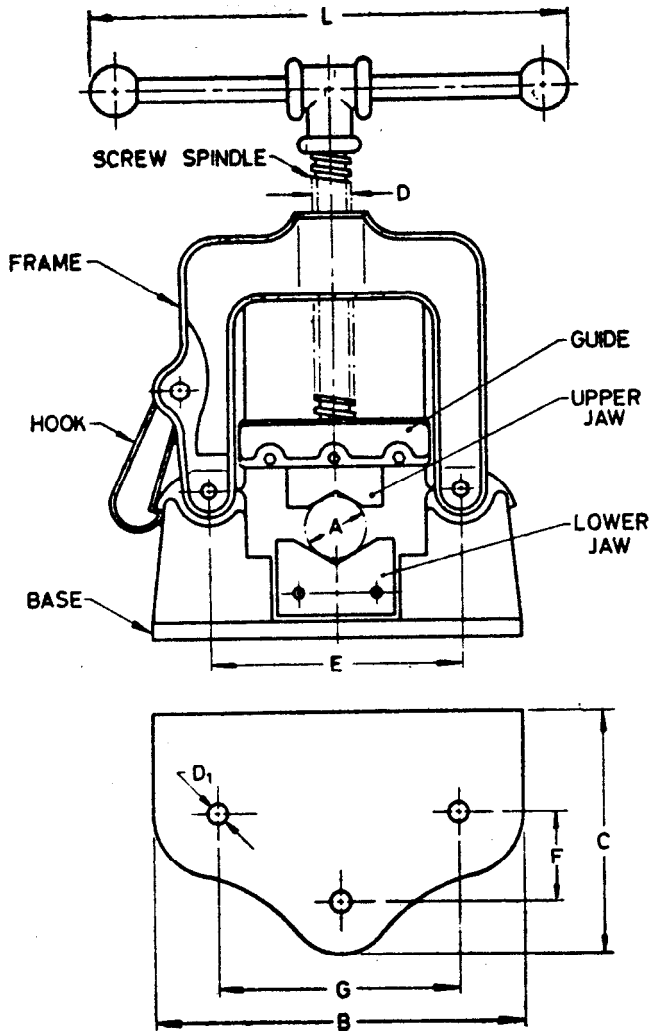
DIMENSIONS FOR PIPE VICES (HINGED TYPE)
